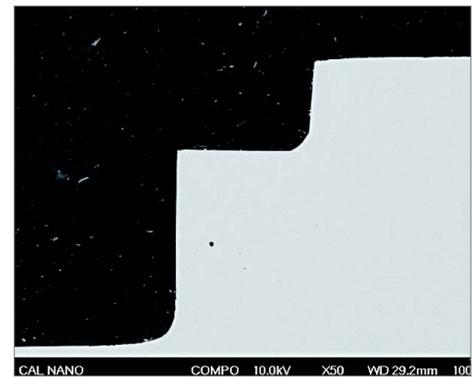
Macro of optimized part after physical tryout, showing no defects.
